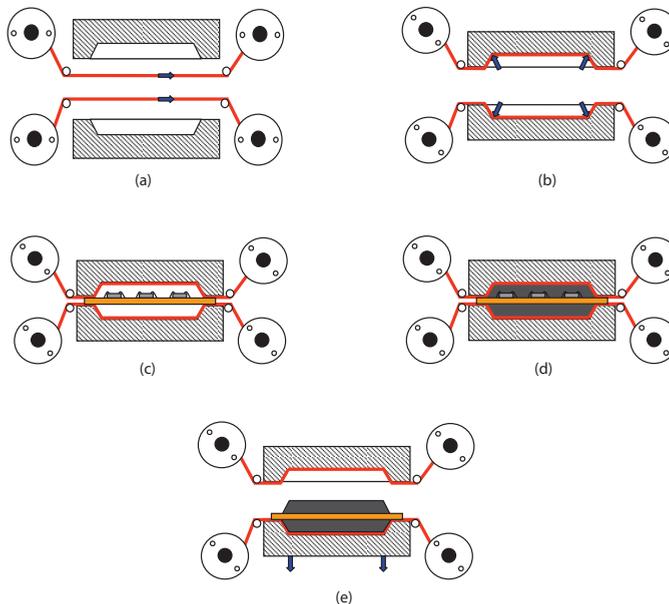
The main steps of FAM process. (a) Intake the fresh film, (b) move the mold to the film position and suck film to the mold inner surfaces by vacuum, (c) load substrates and close mold, (d) fill mold cavity by transferring epoxy molding compound, (e) open mold and unload the molded substrate. Figure adapted from [7].
